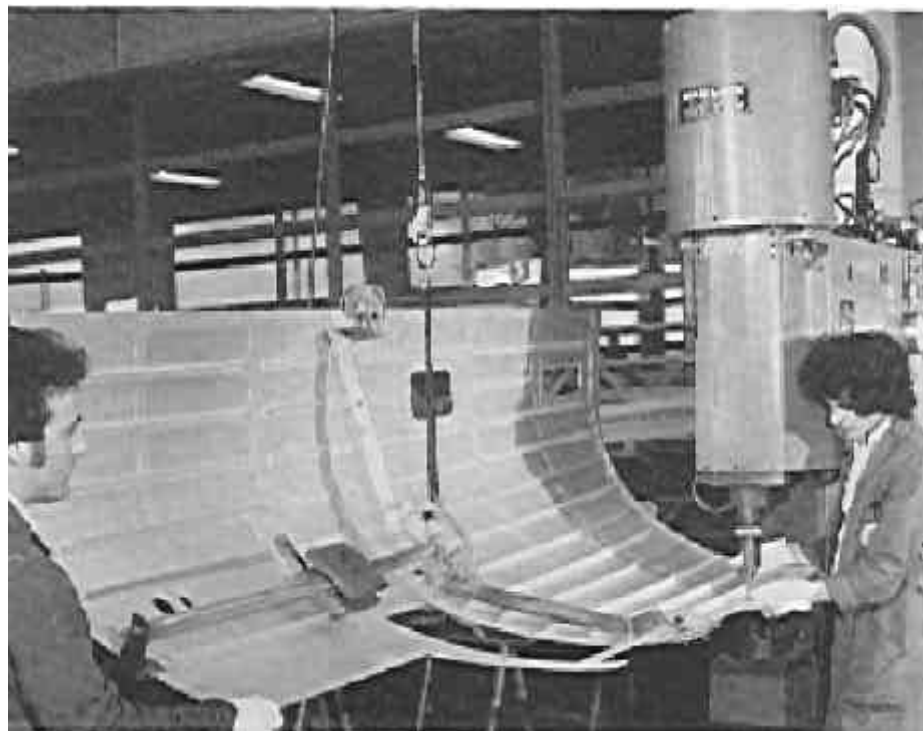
Forward lateral skin panel on Mirage F1 aircraft which have 1100 spot welds to assemble stringers onto the chemically milled panel.
